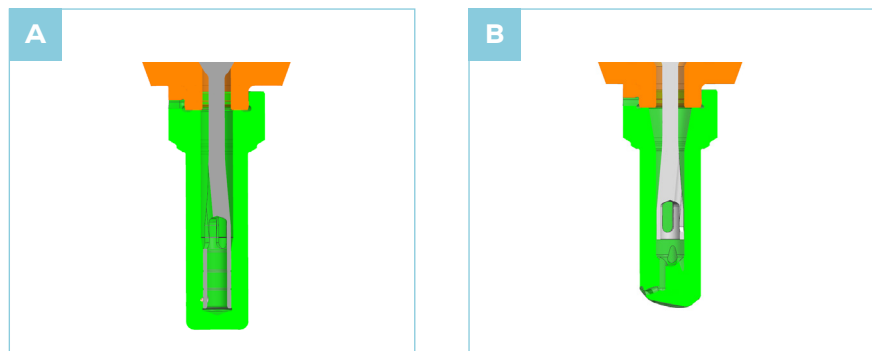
a) Standard slide fuel valve and b) Mini-sac design
